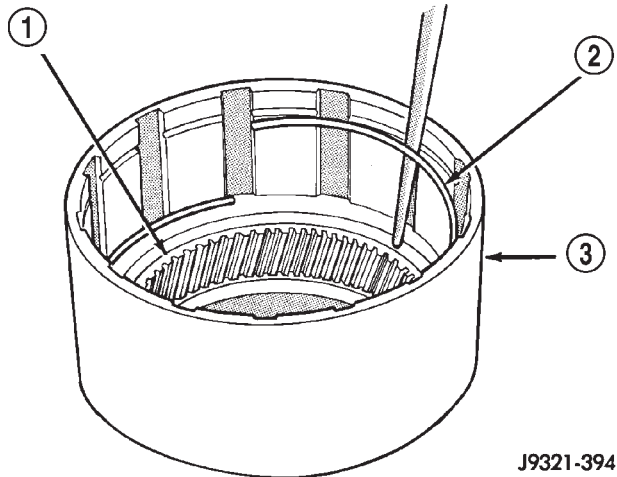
Clutch Drum And Outer Retaining Ring Installation
